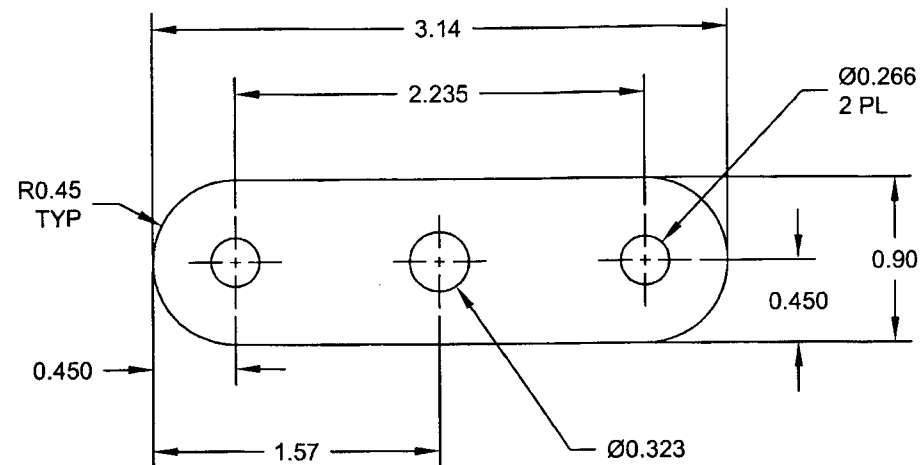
DETAIL D: HOOP & HINGE PLATE DETAIL
